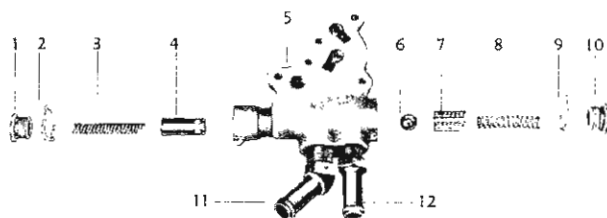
Oil By-Pass Plate and Relief Valve Assembly
